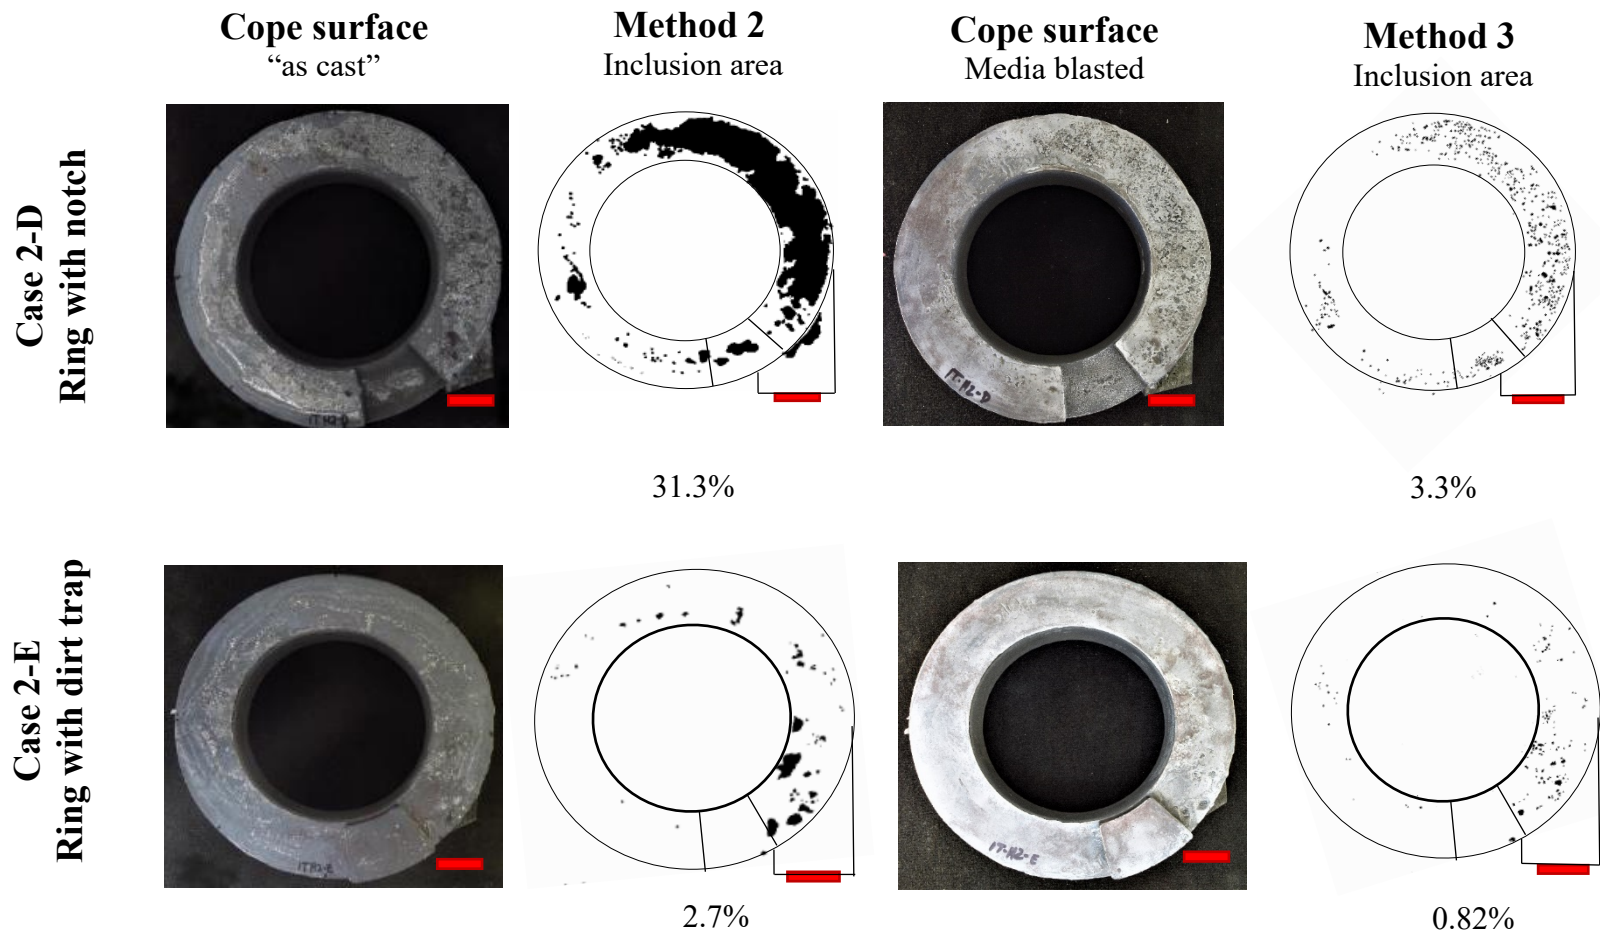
Images of casting surfaces and measurement results for ring casting cases using Methods 2 and 3 from heat 2.
